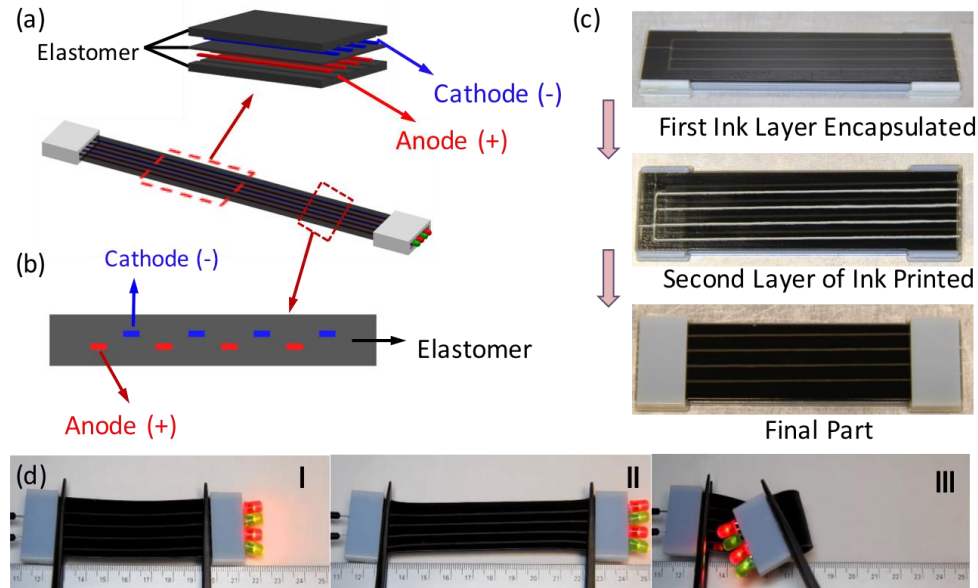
Fully printed stretchable cable by embedded silver wire into PolyJet 3D printed parts: (a) The design of the cable. (b) The cross-section of the stretchable part of the cable. (c) The images of the printed part during the printing process. (d) Embedded silver wires in elastomer as circuits during stretching. Images of the printed cable under tensile strain of (I) 0% and (II) 40% and (III) under folding.
